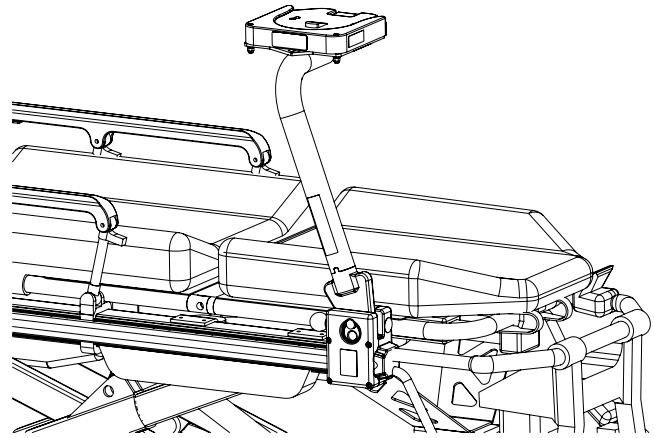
Installing the replacement Standard Surface Base on the tubular arm
